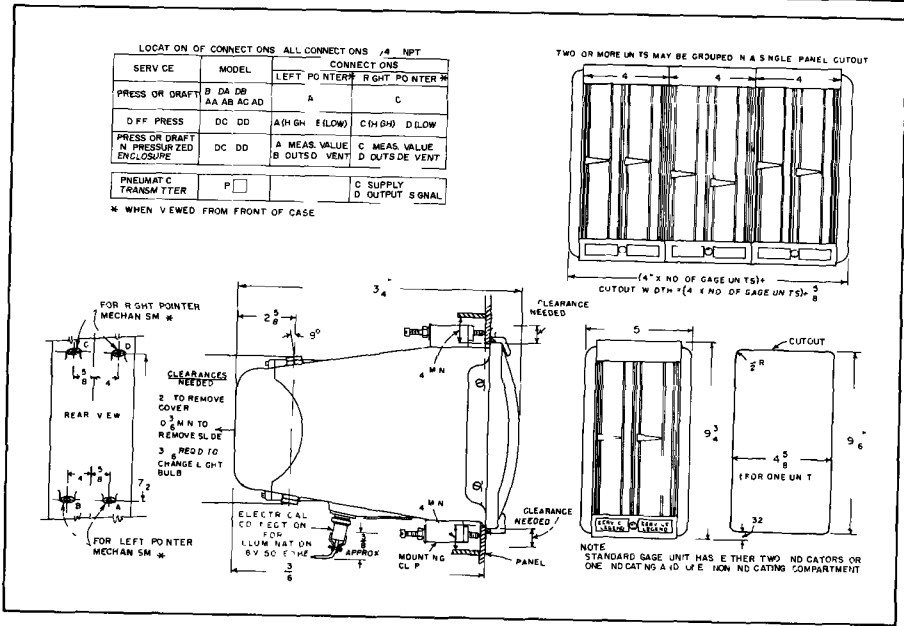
Mounting Dimensions for Flush Mounted Type PG Gage
